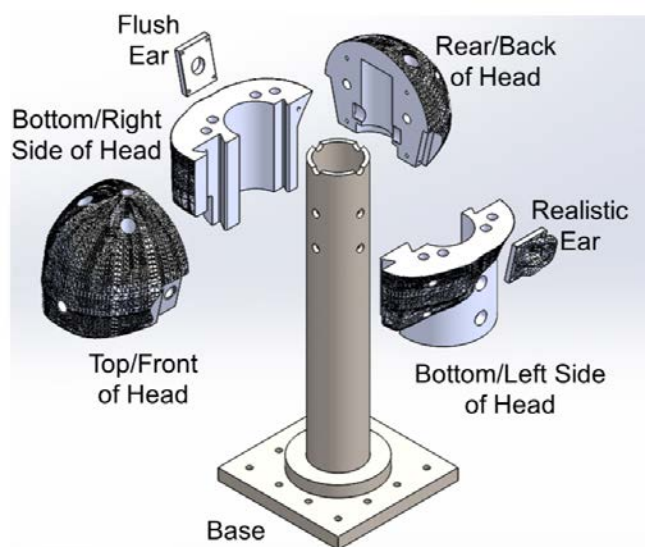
Exploded CAD drawings of the 3D-printed headform and base plate.
